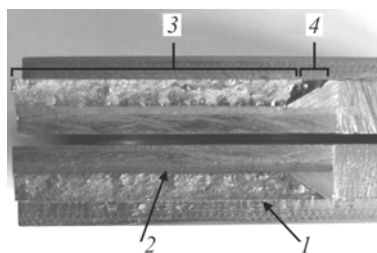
Fracture of the specimen under cyclic mode II loading: 1 – plane side; 2 – grooved side; 3 – mode II crack surface; 4 – mixed mode crack surface.
